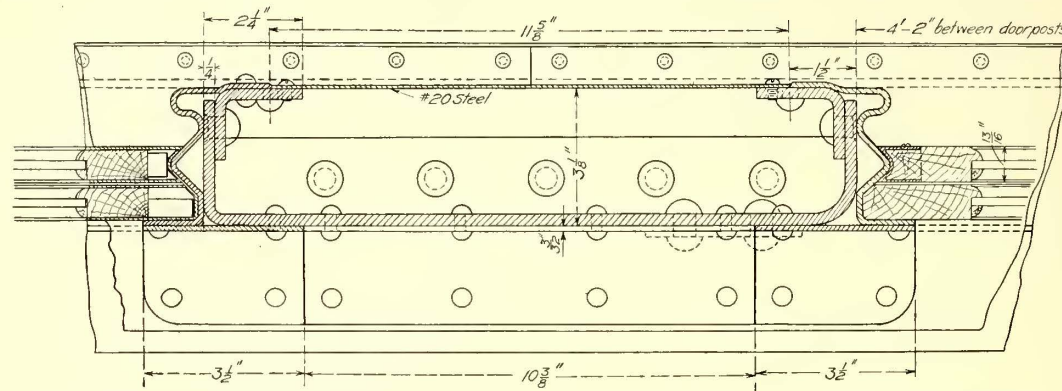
ONE OF THE TWO WIDE CENTER WINDOW POSTS, SHOWING ARRANGEMENT FOR SASH AND CURTAIN GROOVES
